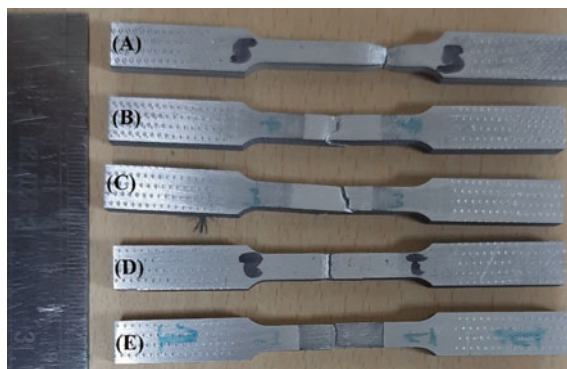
Fractured tensile specimen of (A) base metal, (B and C) welded specimens at 1100 rpm, and 98 mm/min, (D and E) welded specimens at 1500 rpm and 98 mm/min
